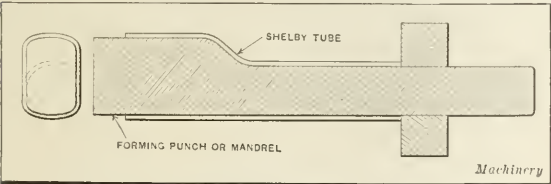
Shelby Steel Tubing with Bulging Mandrel in Place
